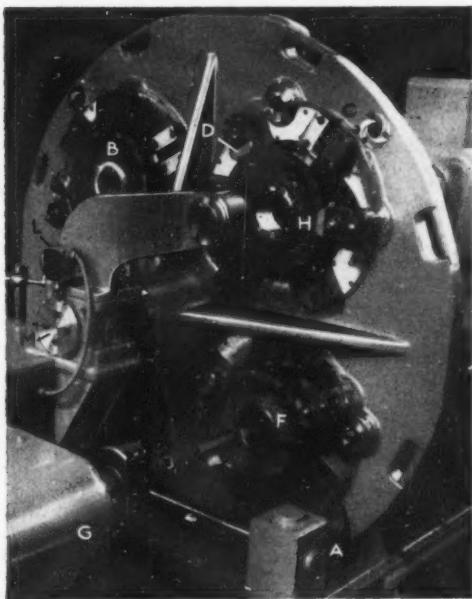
Close-up View of the Fixture Drum of the Machine Shown in Fig. 9
